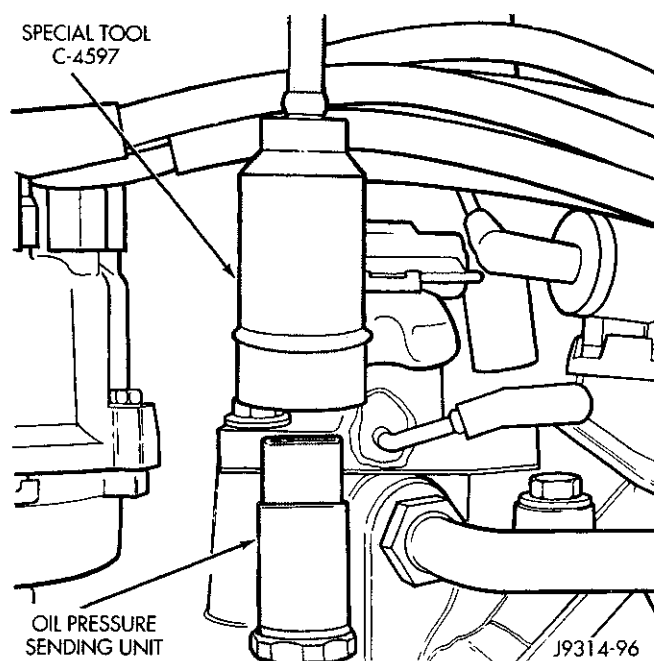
Oil Pressure Sending Unit—3.9L/5.2L/5.9L Engines
